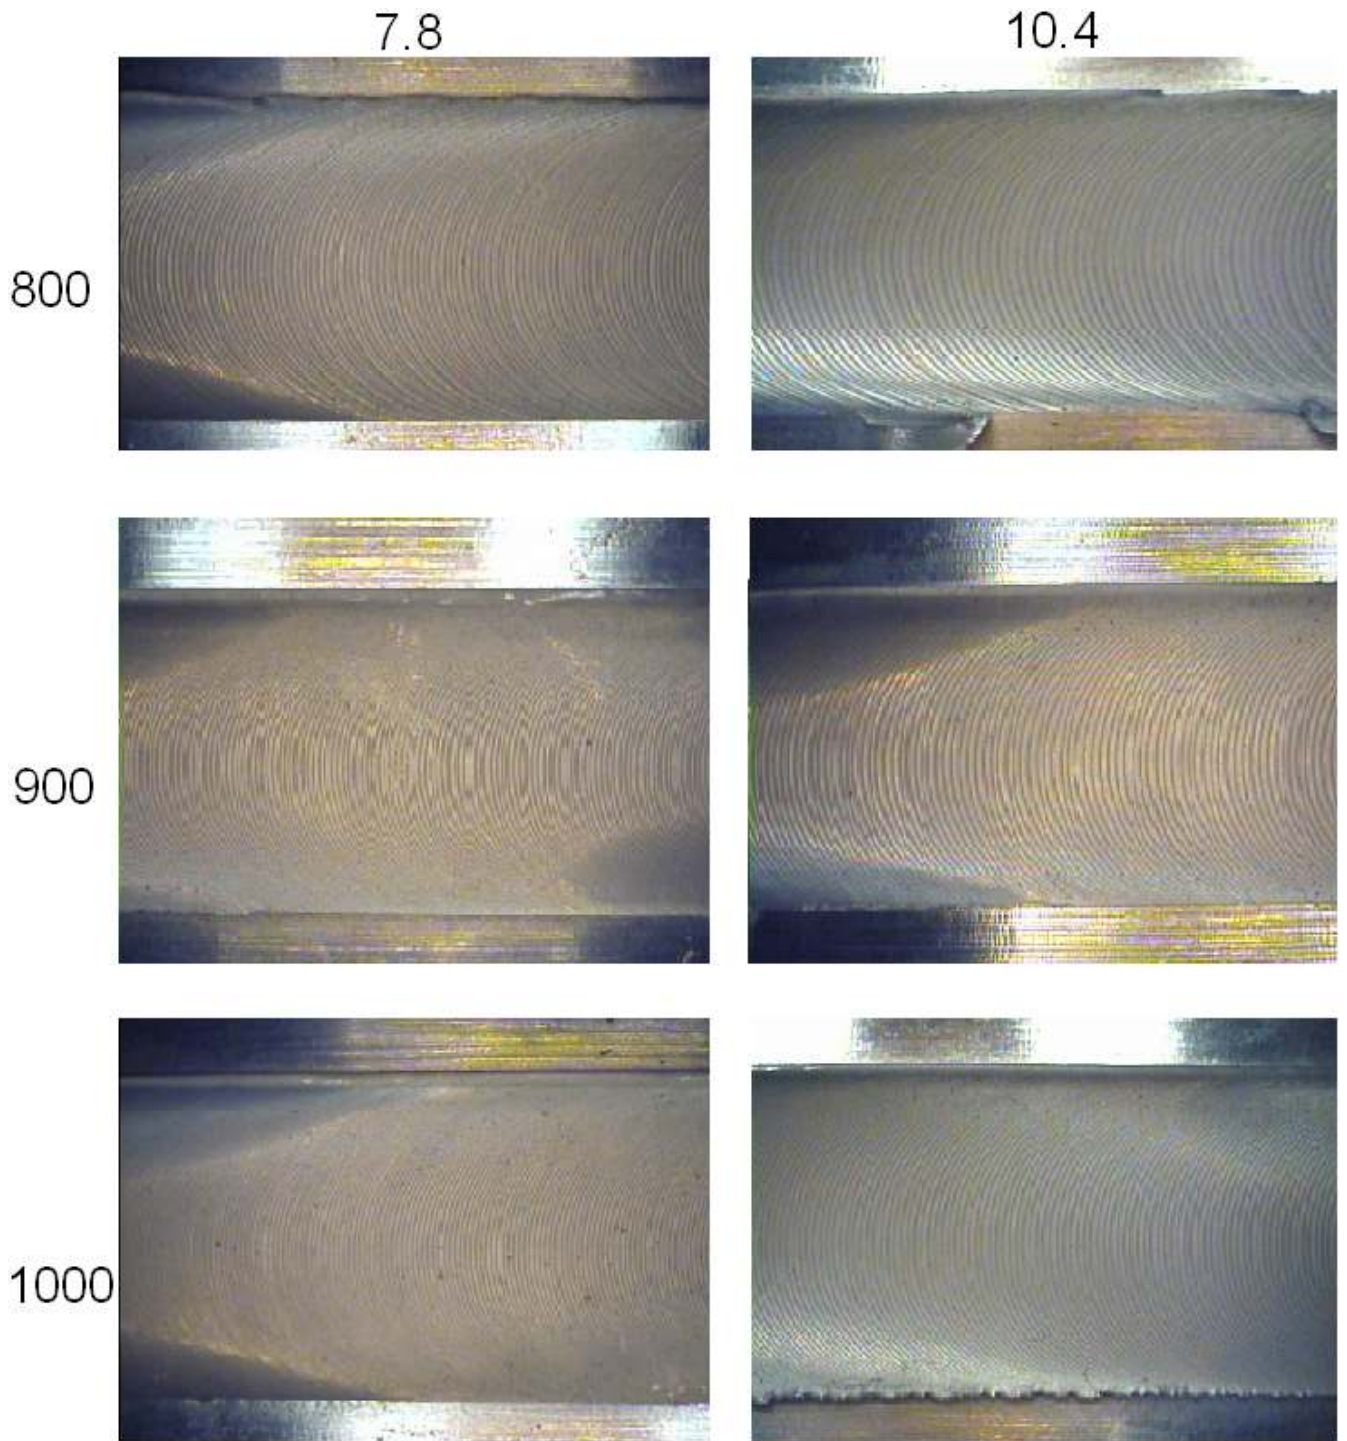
Surface appearance for full-penetration, supported welds made with the cupped shoulder, threaded probe tool. Samples are taken from the steady-state, steady-depth portion of each weld.
